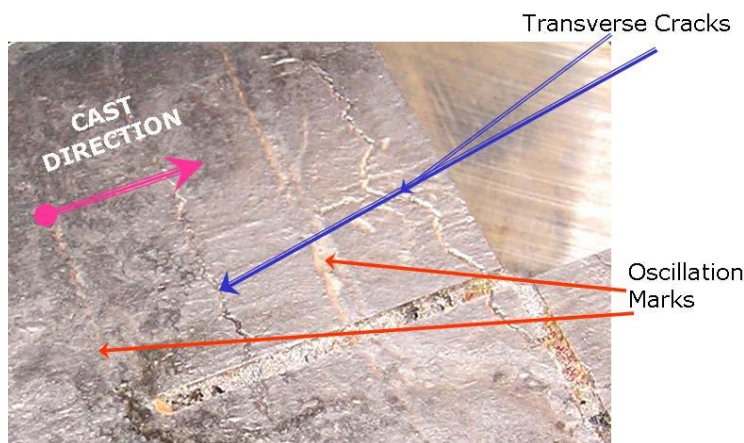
An example of transverse cracks formed during solidification of continuous casting steel process [41].
